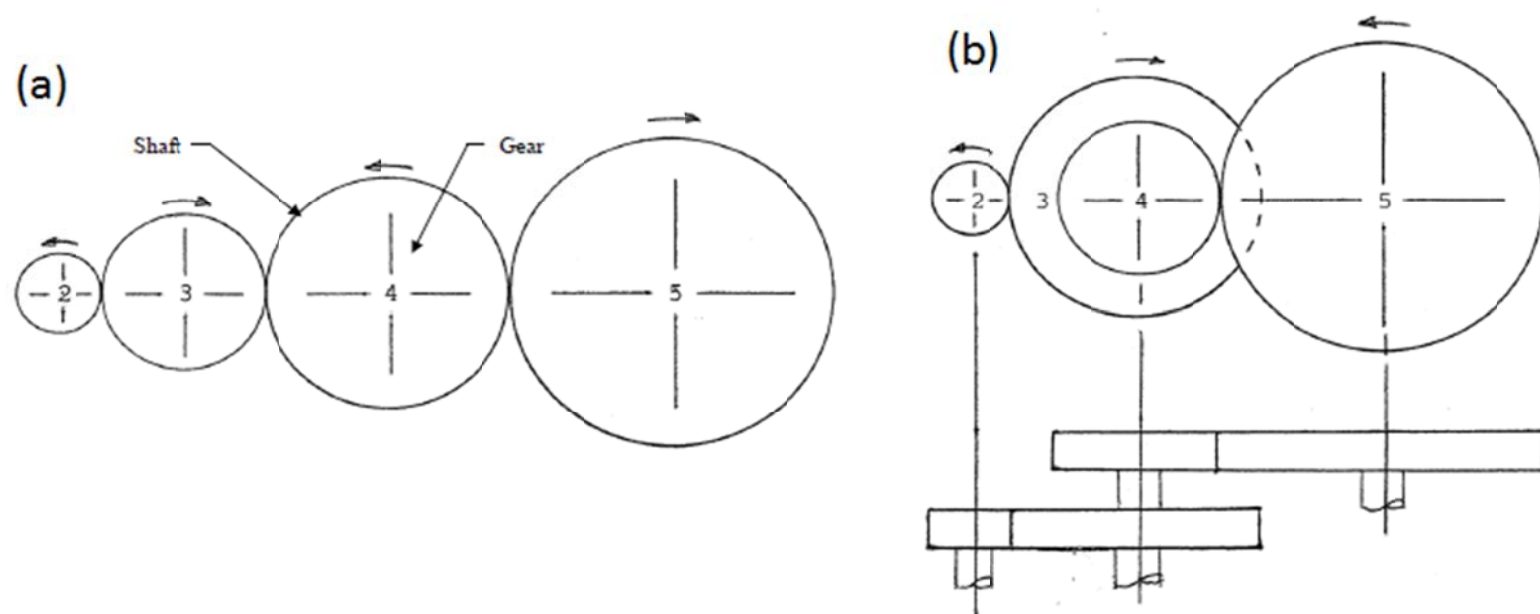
(a) Simple Gear Train (b) Compound Gear Train
